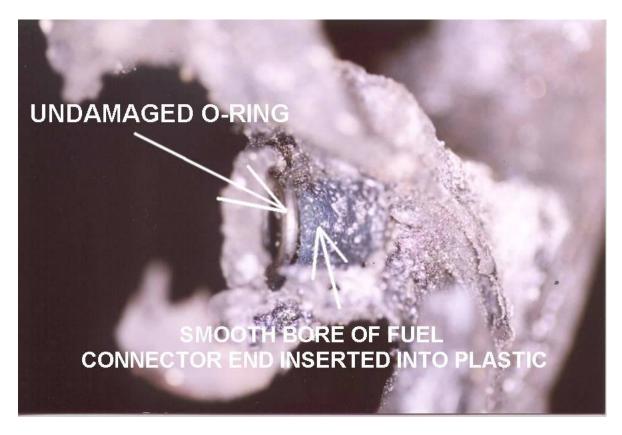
FUEL RAIL REMNANT SHOWING O-RING AND FUEL HOSE END IMPRESSION
